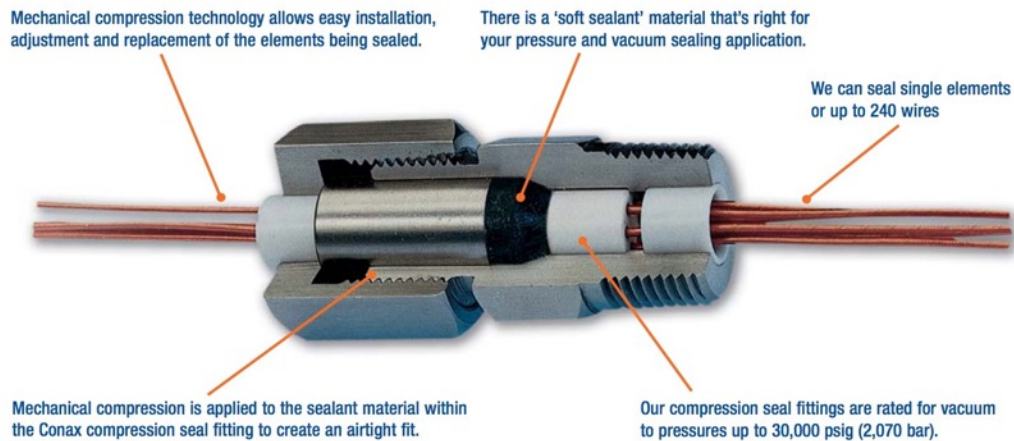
shows the Conax feedthrough that provides compression seal without the need to cut the cable.
